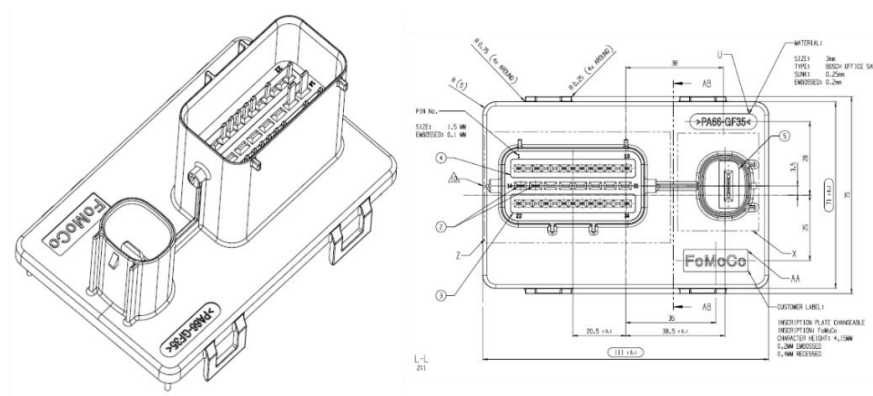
Example of Electrical Connector Unit. In the technical drawing it is shown that the size is 11.1 cm x 7.1 cm.
